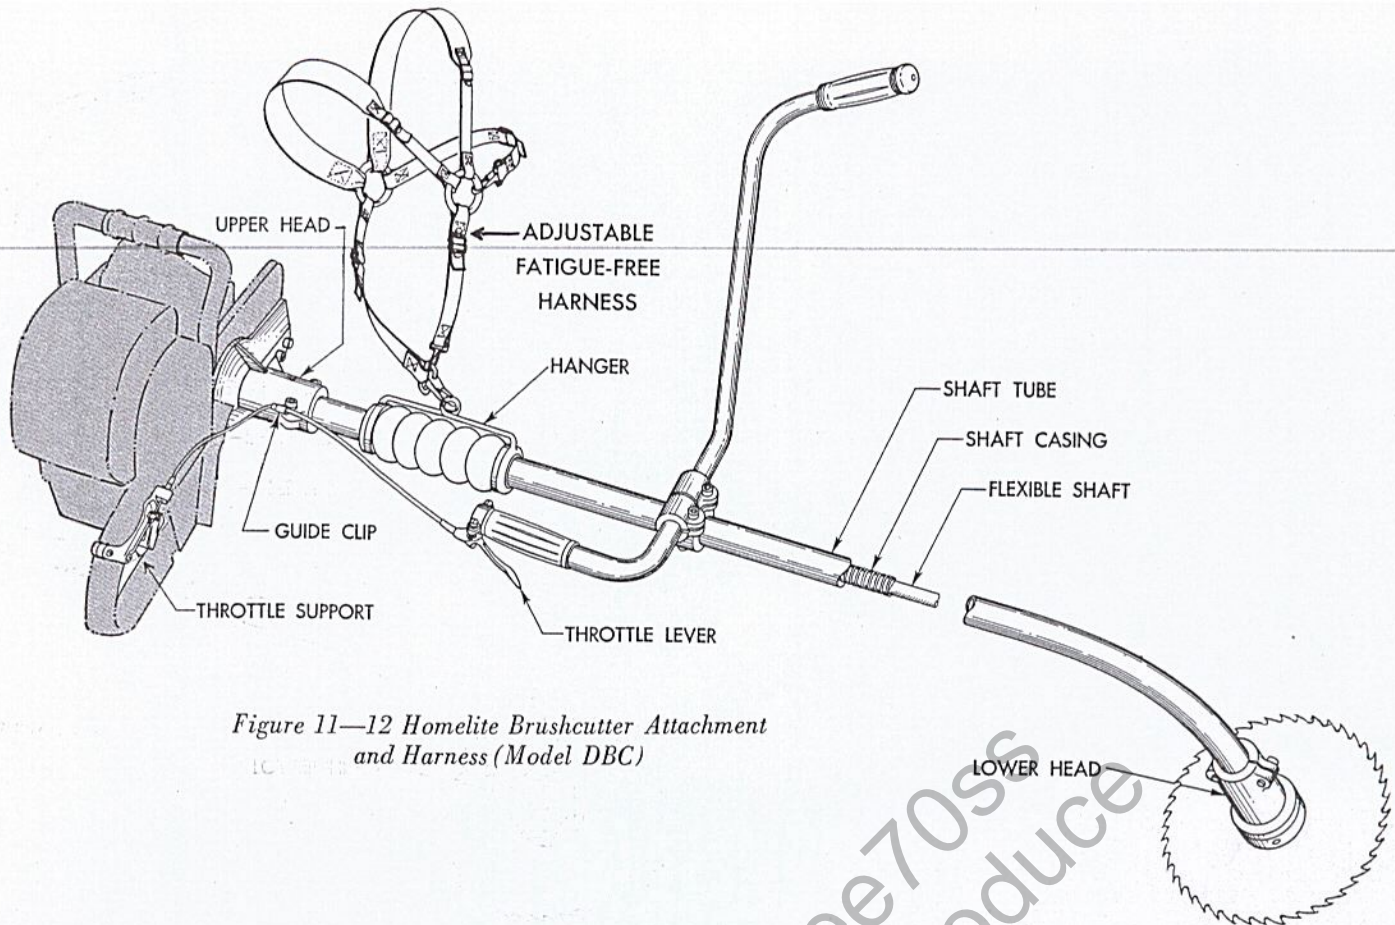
12 Homelite Brushcutter Attachment and Harness (Model DBC)
